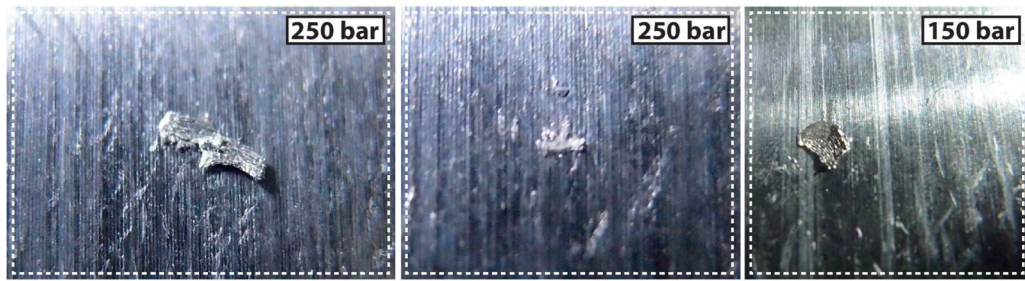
Scratches and welded chip fragments on the surface of the workpiece (150 bar and 250 bar).
